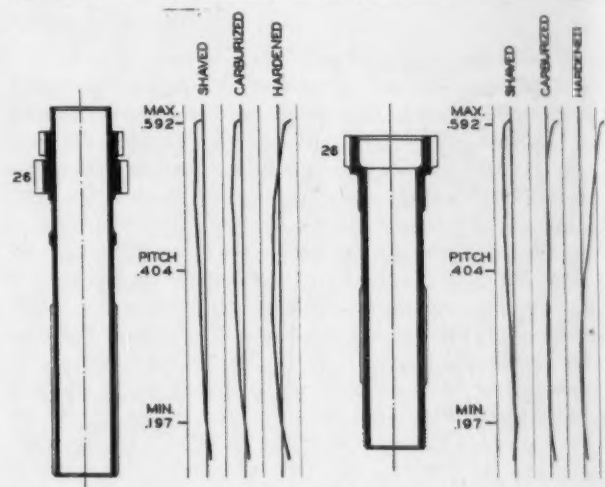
Impeller shaft gear tooth expansion during carburizing and hardening
